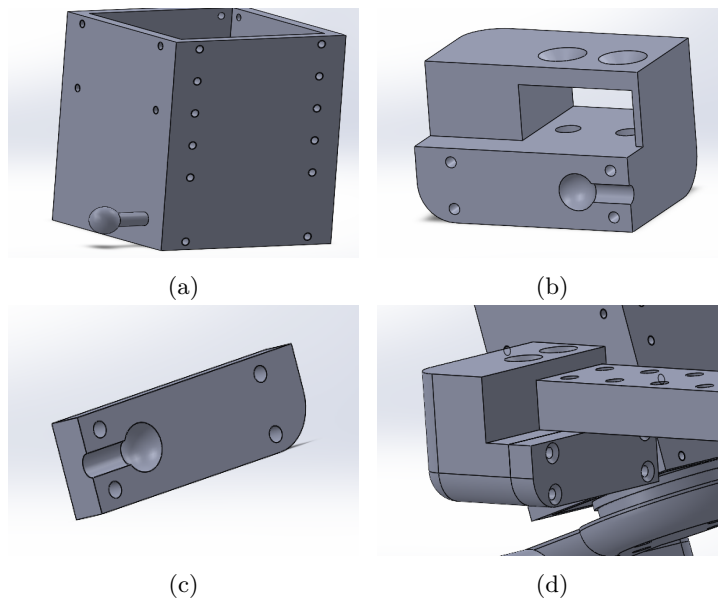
Provisional joint design for rotation in the perpendicular axis to the rotation of the motor. (a) Motor model with spherical joint. (b) Joint between the adjustable model and the motor model. (c) Joint counterpart. (d) Mounted joint representation.
